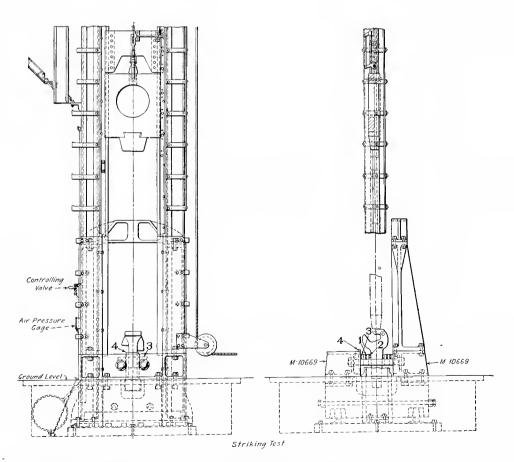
Details for Standard Striking Test for M. C. B. Couplers. (M. C. B. Sheet 29B.) See also Fig. 2734.
